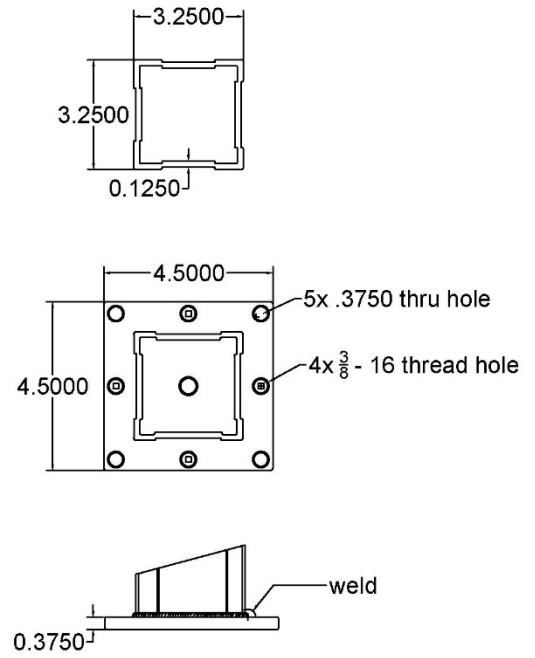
3.25 IN. WELDED POST
